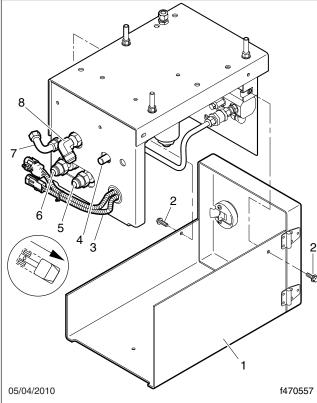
, CNG Fuel Cylinder Storage Box (5-cylinder system shown)
